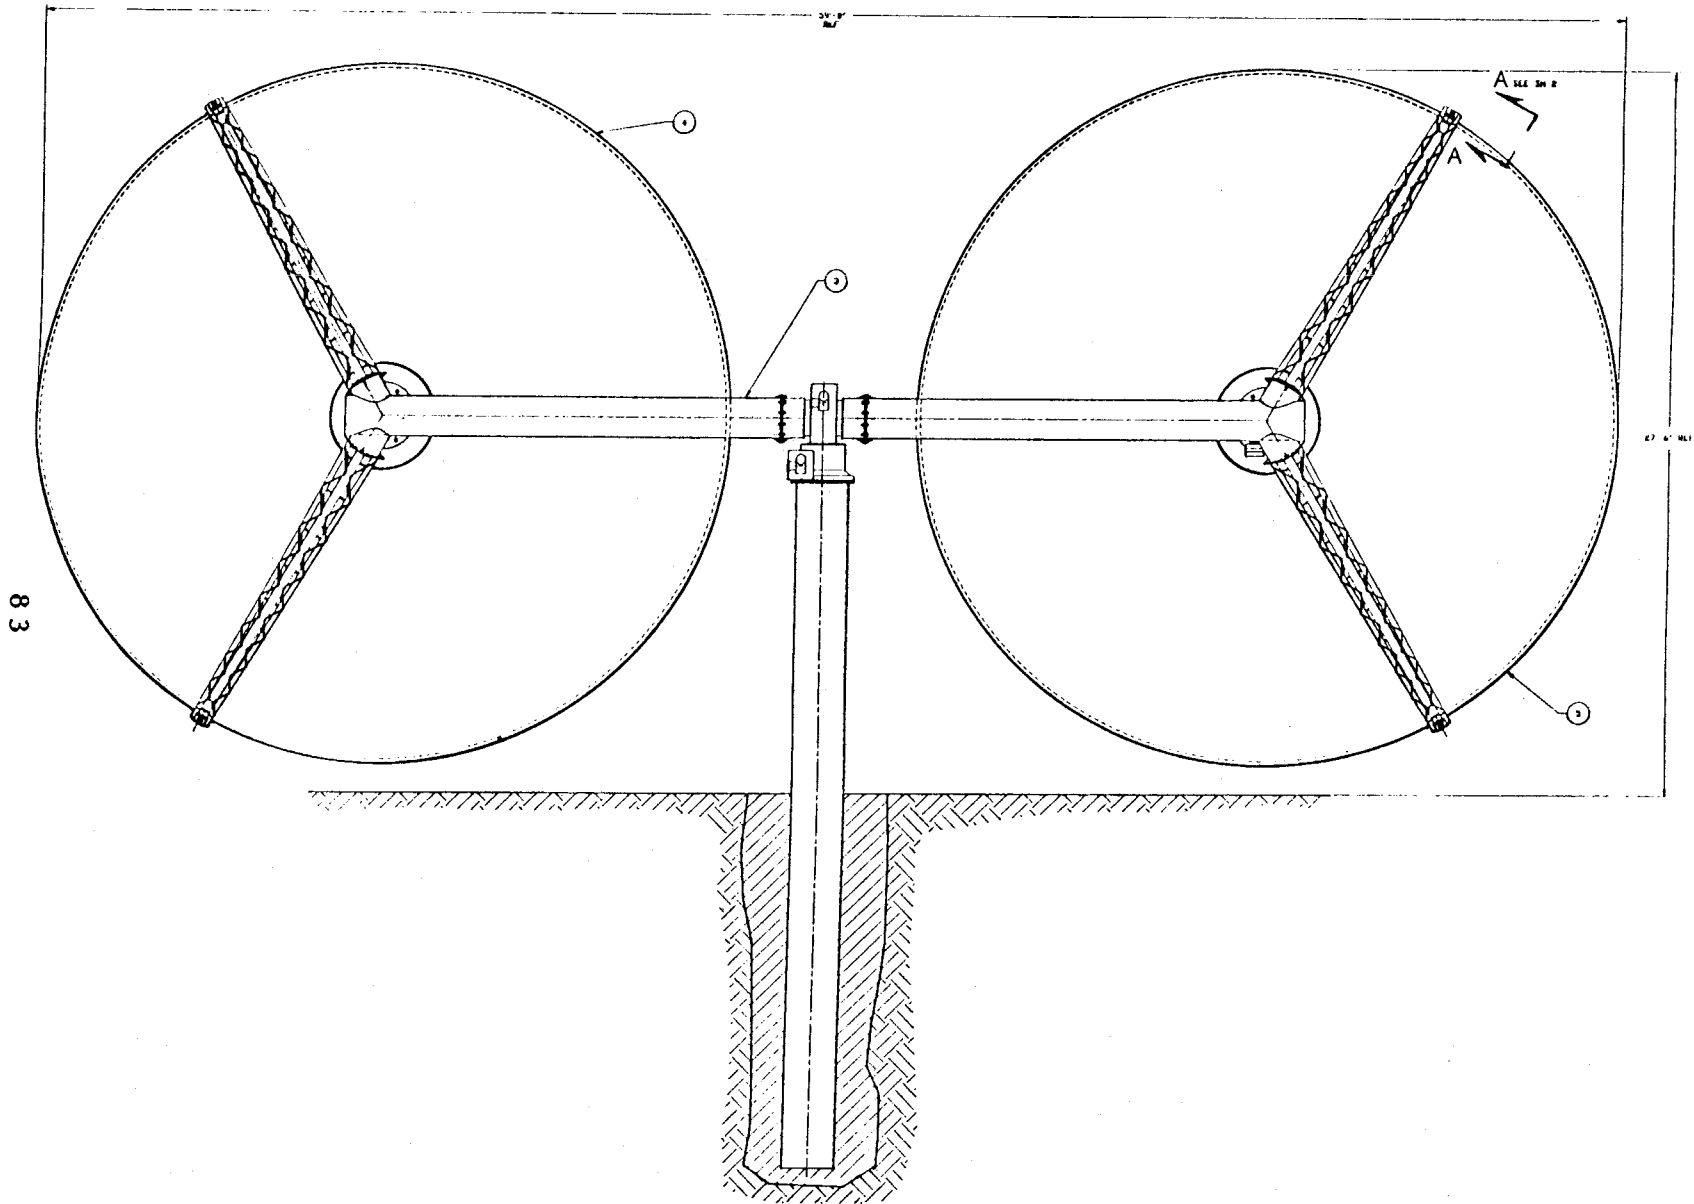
Assembly Drawing of SAIC Dual Module Heliostat
